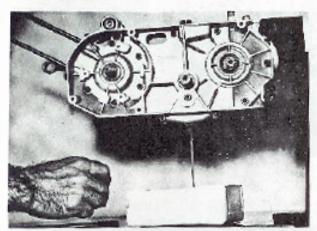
To drain the engine oil, loosen and remove the drain plug on the bottom of the crankcase.
